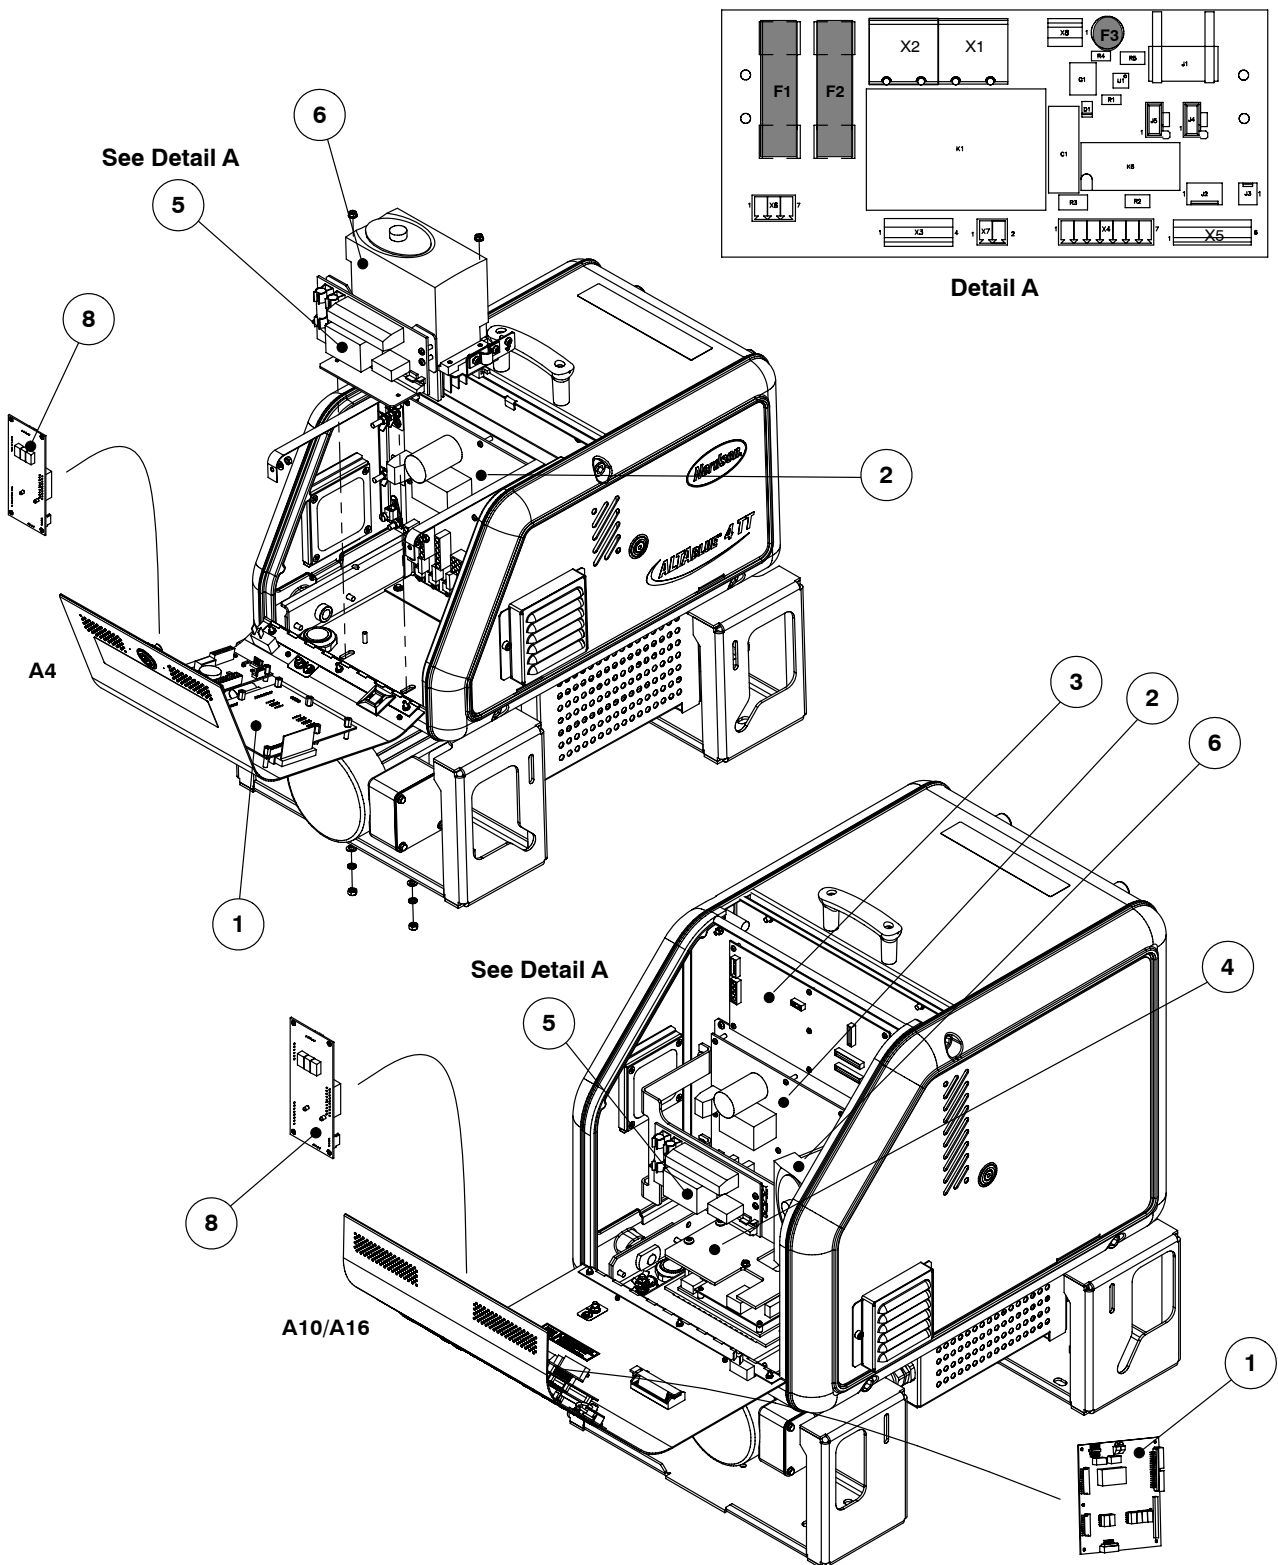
Circuit boards and motor drives on melters with a relay board
